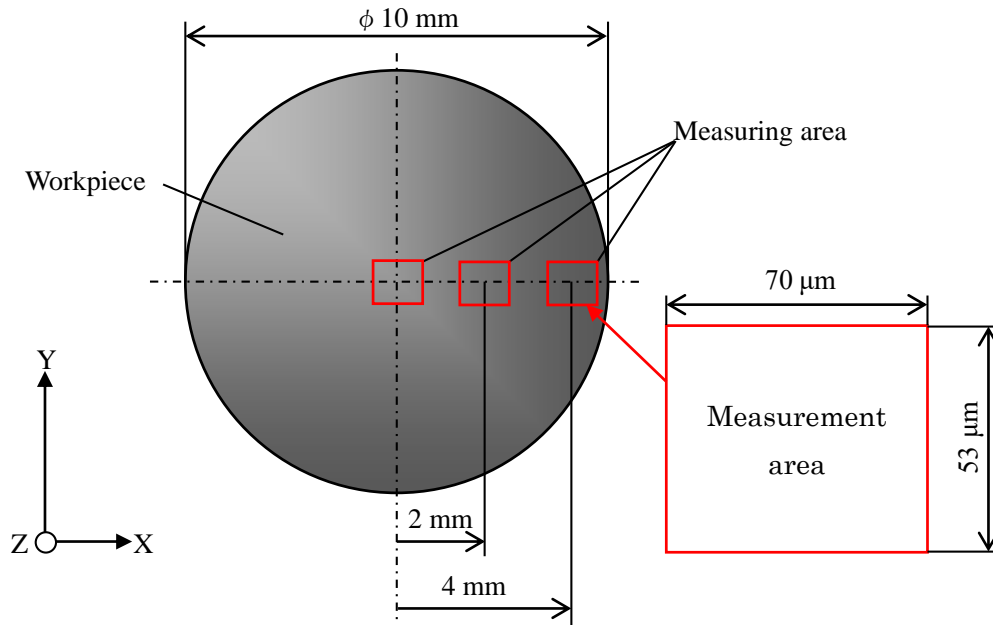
Measurement area of machined workpiece with New View6200.
